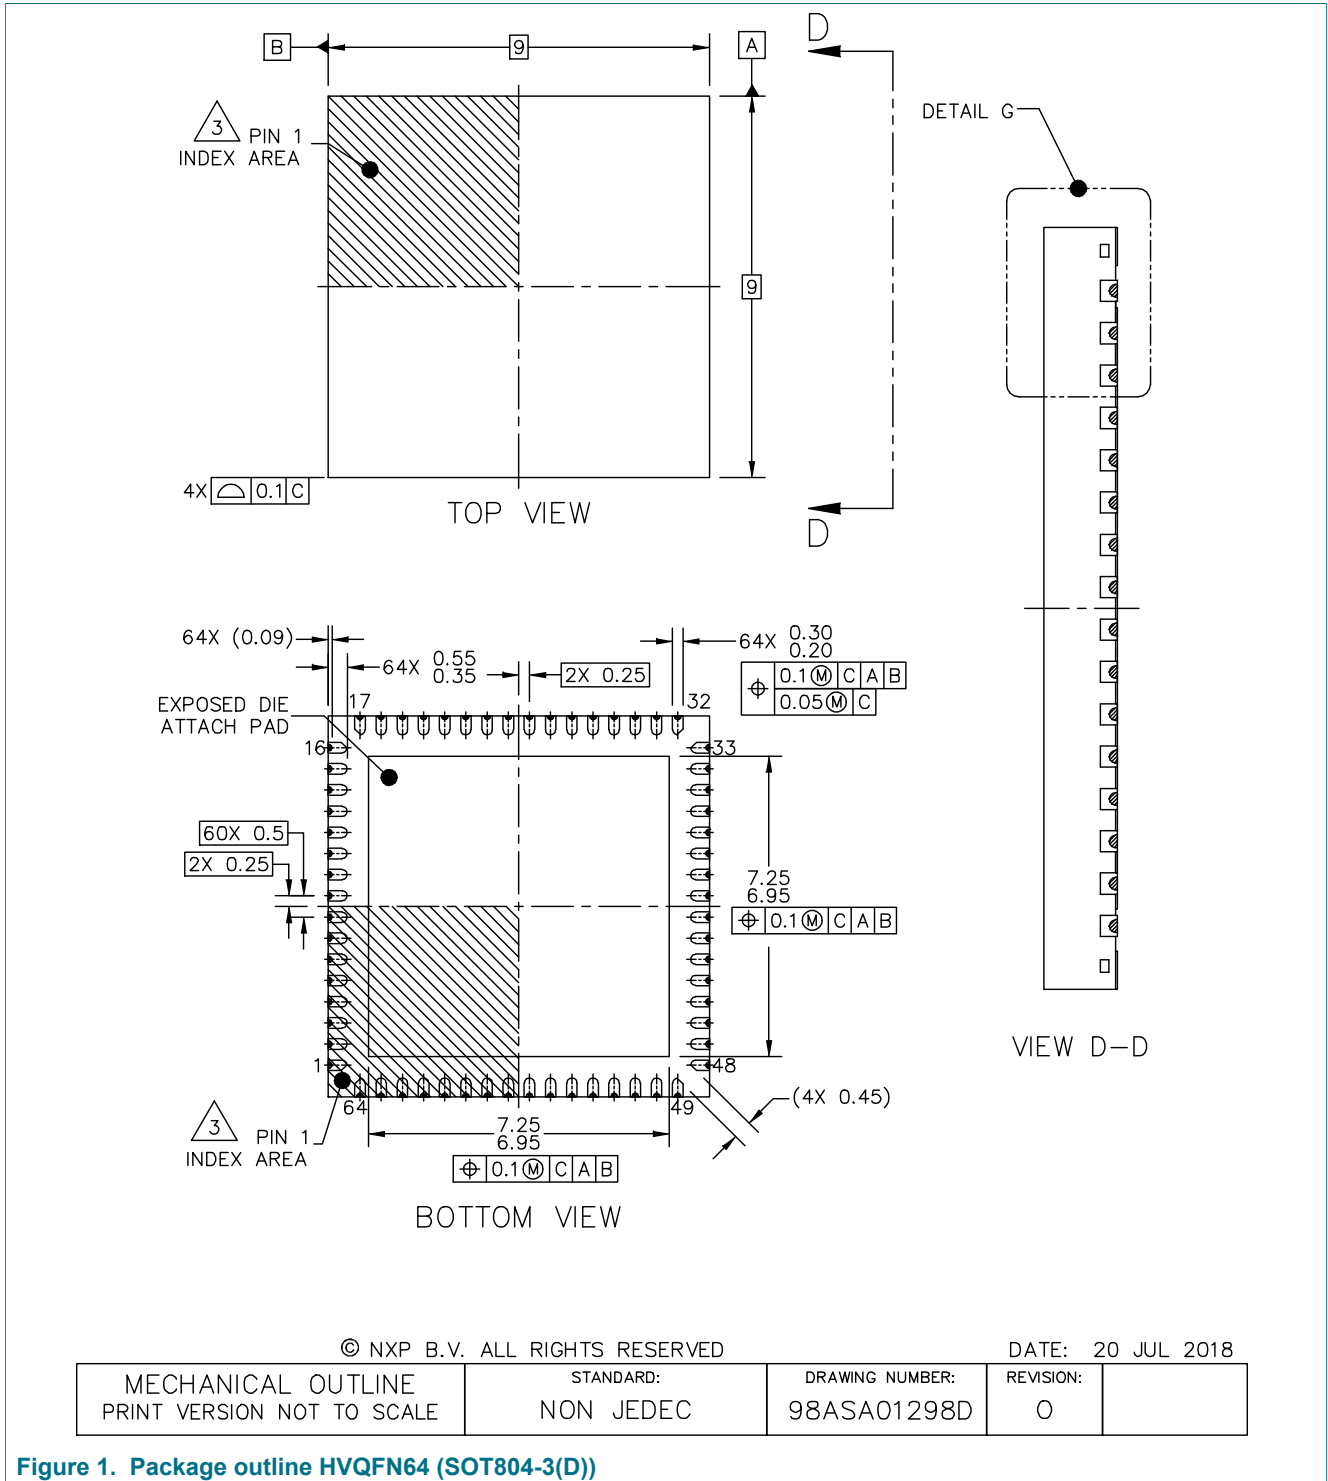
Package outline HVQFN64 (SOT804-3(D))
